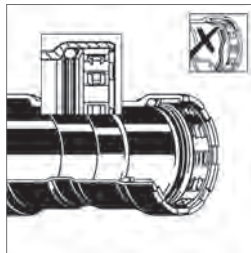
Ensure the proper seat of sealing element, separator ring and cutting ring.
